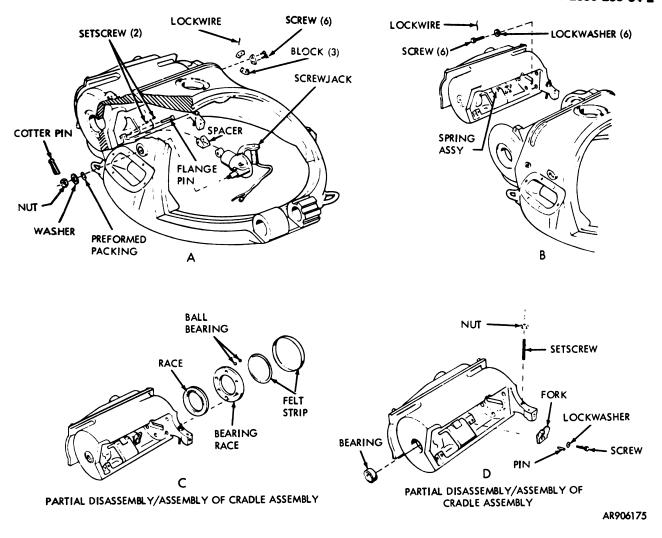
M1 cupola cradle and body disassembly or assembly (vehicles serial numbered A3001 thru A3374).
